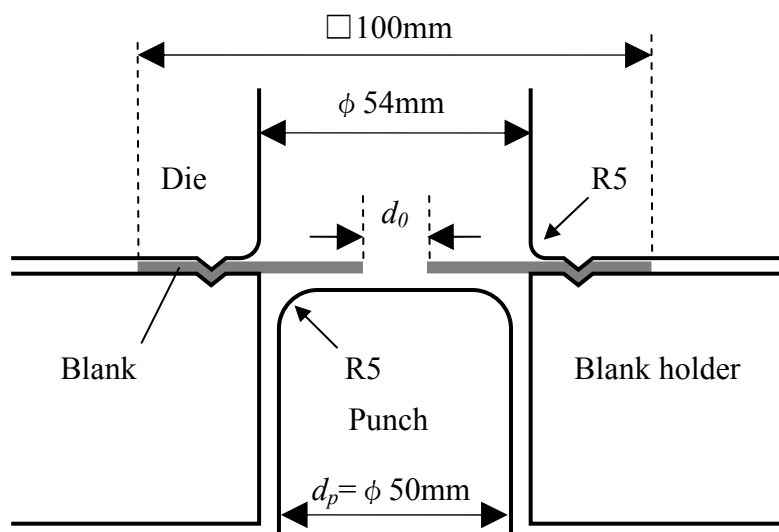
Schematic drawing of used geometry for hole expansion test.
